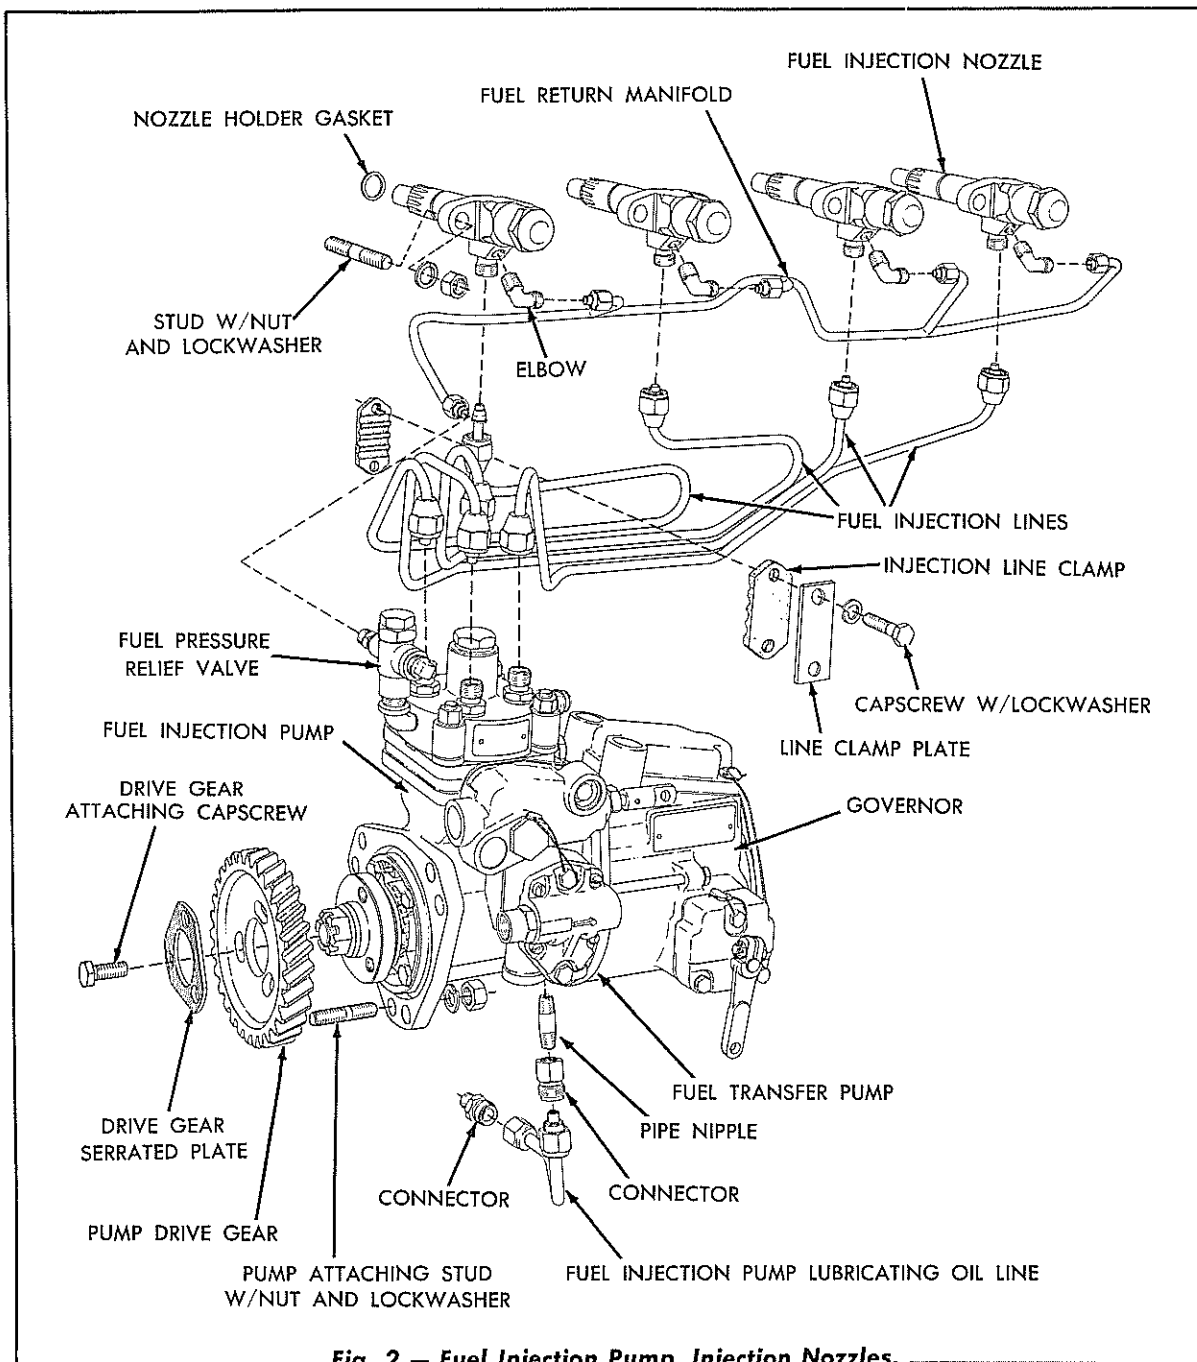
Fuel Injection Pump, Injection Nozzles, and Fuel Pressure Relief Valve
